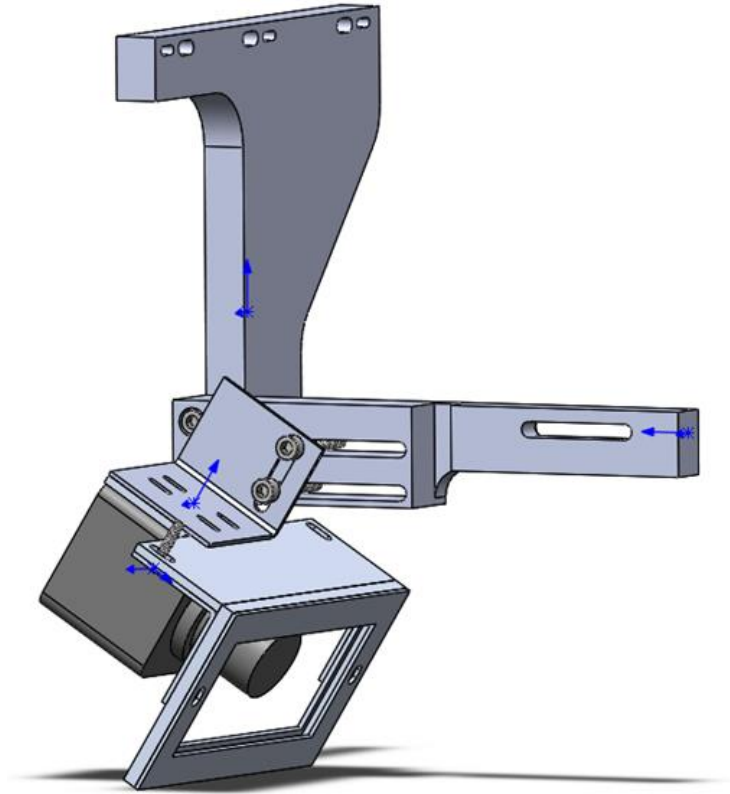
All the mechanical fixture components used to attach the camera system to the existing machine.
